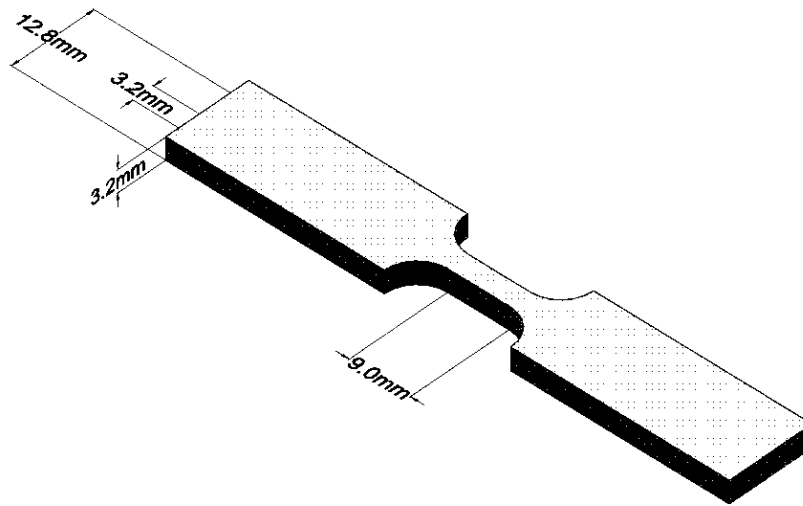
Dimensioned specimen used for low-cycle fatigue testing
